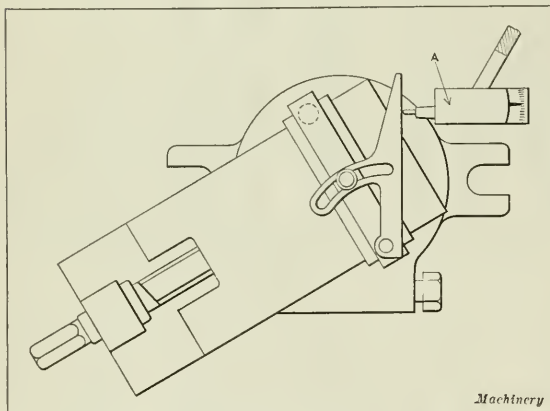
Method of Setting a Milling Machine Vise by the Use of a Sine Bar
